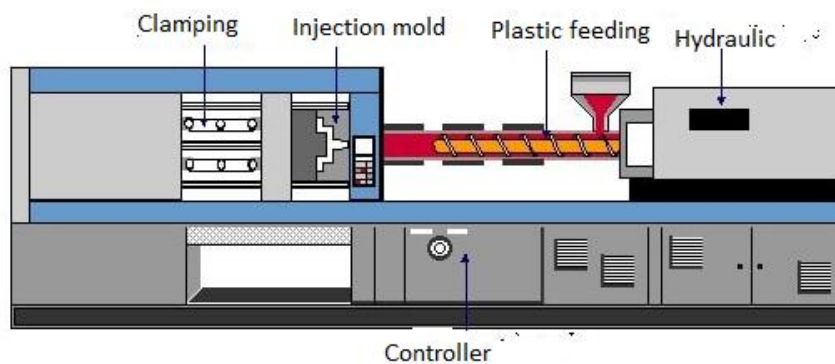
Structure of a plastic injection molding machine using a hydraulic mechanism
